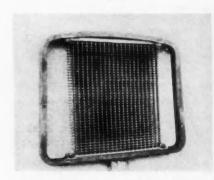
Oil cooler mounted on 16-gage sheet-steel channel frame
